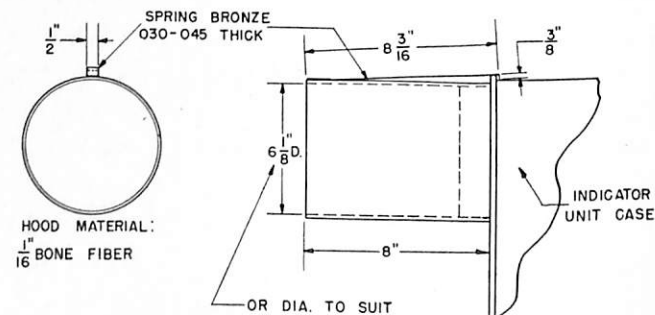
Removable hood for the Model DAS equipments, to remove outside glare.
